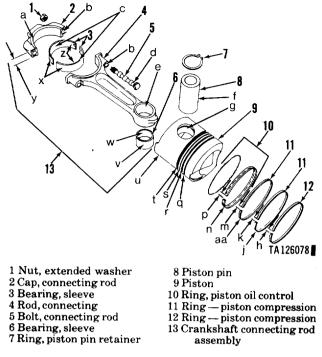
Piston, connecting rod and associated parts exploded view.
